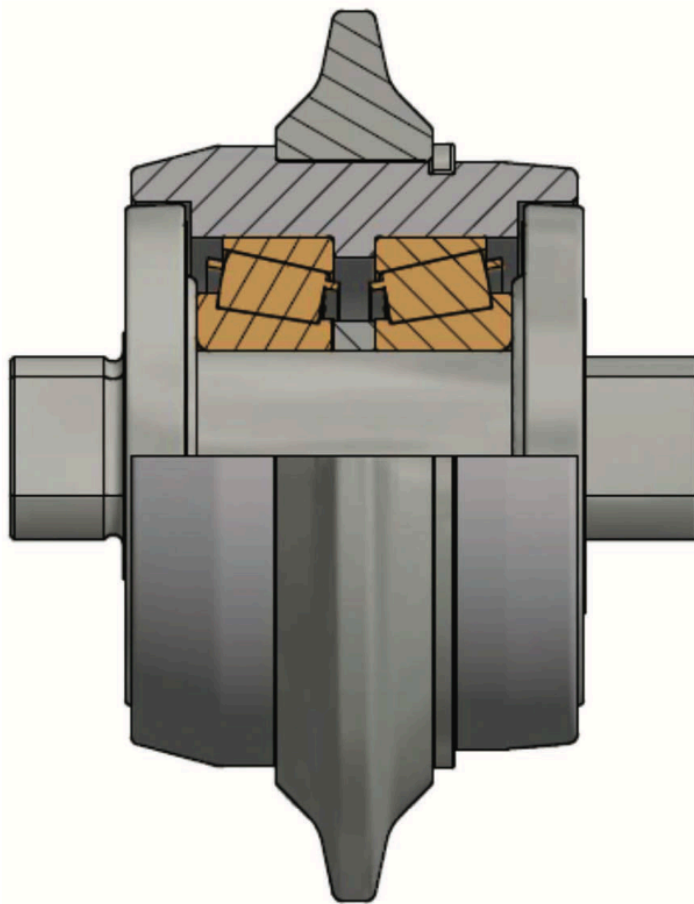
Cutter disc with section showing bearings. Adapted from P. Grasso et al. (2023), figure 2.36
